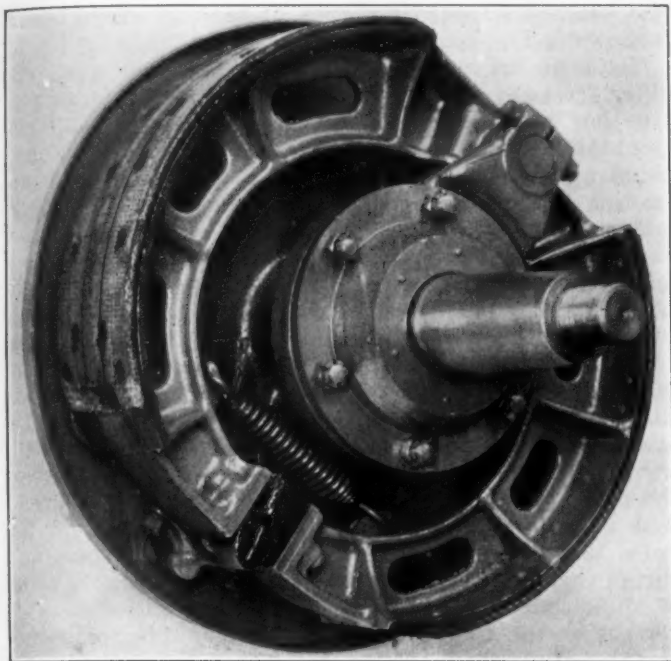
VIEW OF REAR-WHEEL BRAKE-SHOE ASSEMBLY
